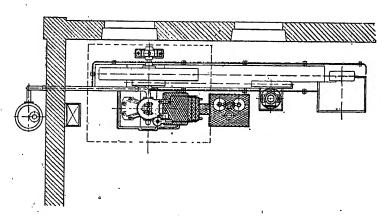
and 330.—Single-cylinder Diesel Engine Plant driving a Transmission Shaft (Grazer).
